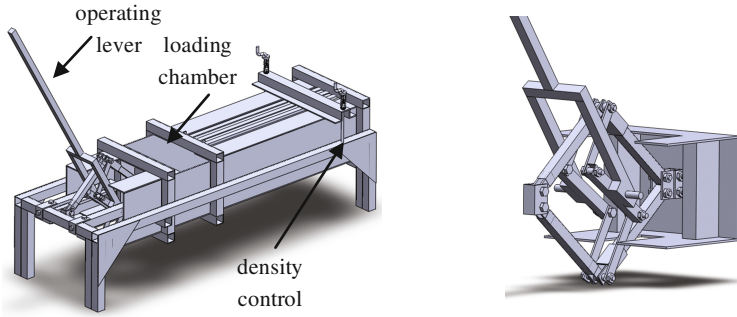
Press with continuous bale production and slider crank actuation mechanism: detailed design and prototype
